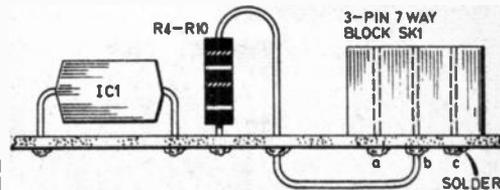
Edge-on view of p.c.b. showing resistors R4 to R10 and their connection to the 7-way socket block.
